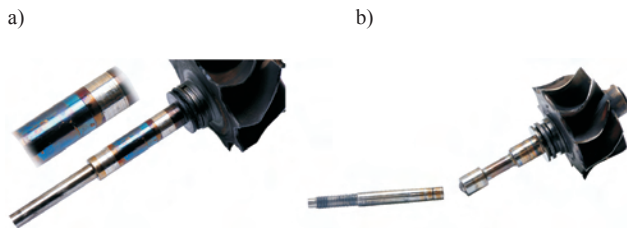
Damage of the turbine rotor: a) surface overheat zone visible (purple-blue) caused by insufficient lubrication, b) breaking of the turbine rotor shaft caused by a seizure of the turbocharger bearings [5]
